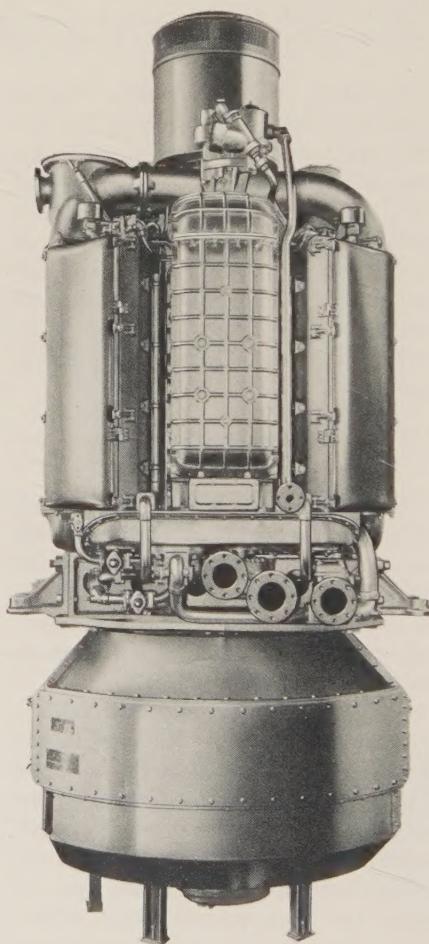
To meet the design specifications for least weight and greatest strength of engine parts, the crankcase of the vertical, radial, 16-cylinder, two-cycle, high-speed Diesel engine was constructed of a welded assembly of steel forgings and steel plates.
